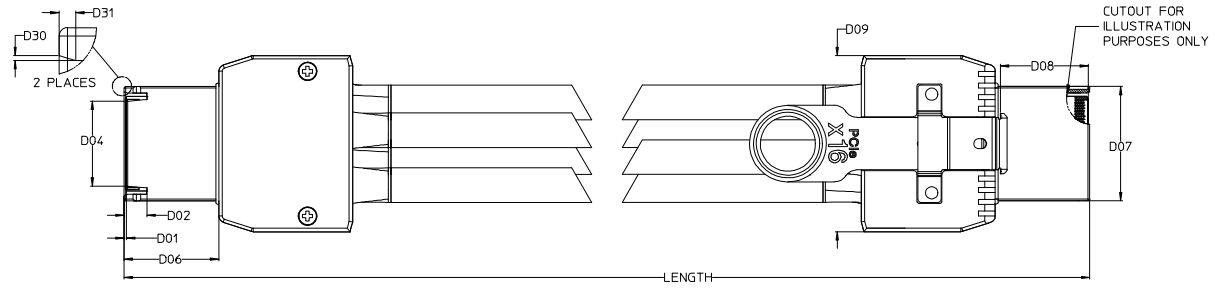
x16 Cable Assembly Top and Bottom Views
